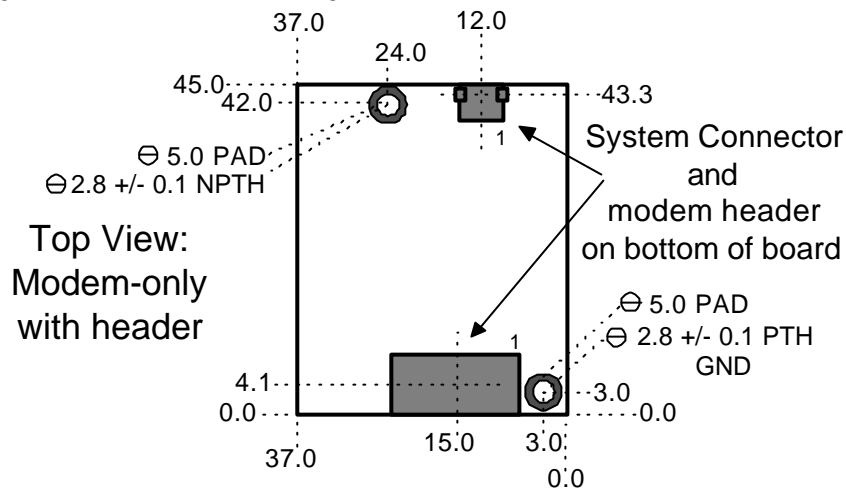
Mechanical dimensions for International Modem-Only MDC with header
